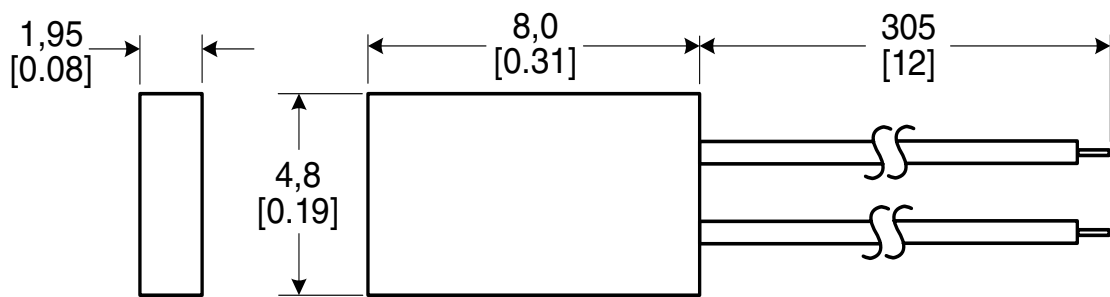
Mounting Dimensions (For reference only. mm/[in].)
